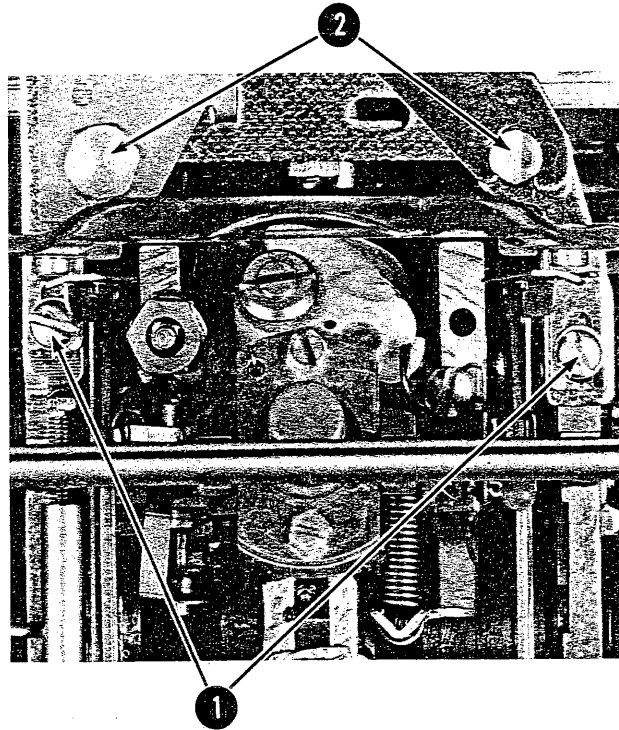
Carrier-Shoe Removal (Steps 1-3)
